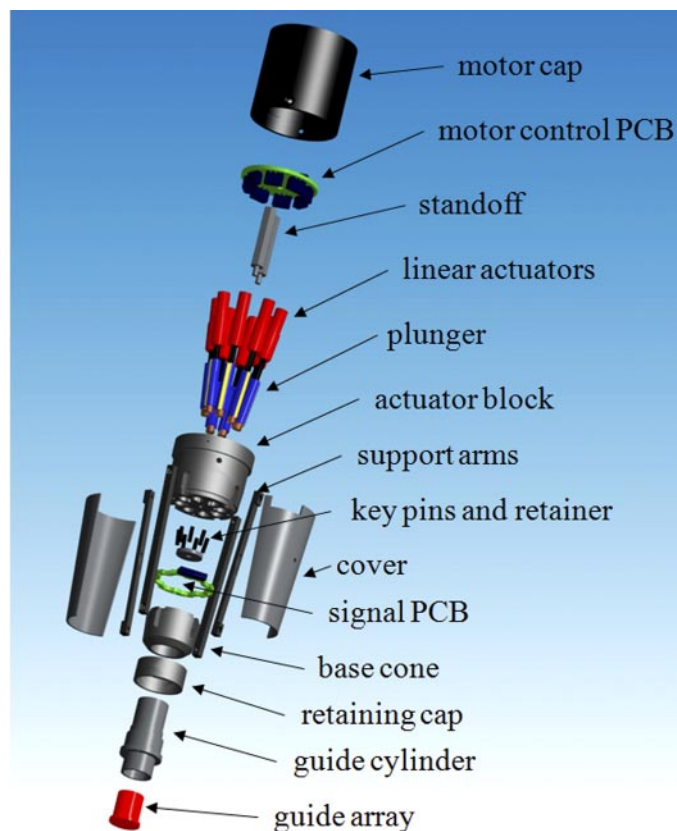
Exploded view of the design drawings of the microdrive system revealing all component parts and their relative positions within the device.
